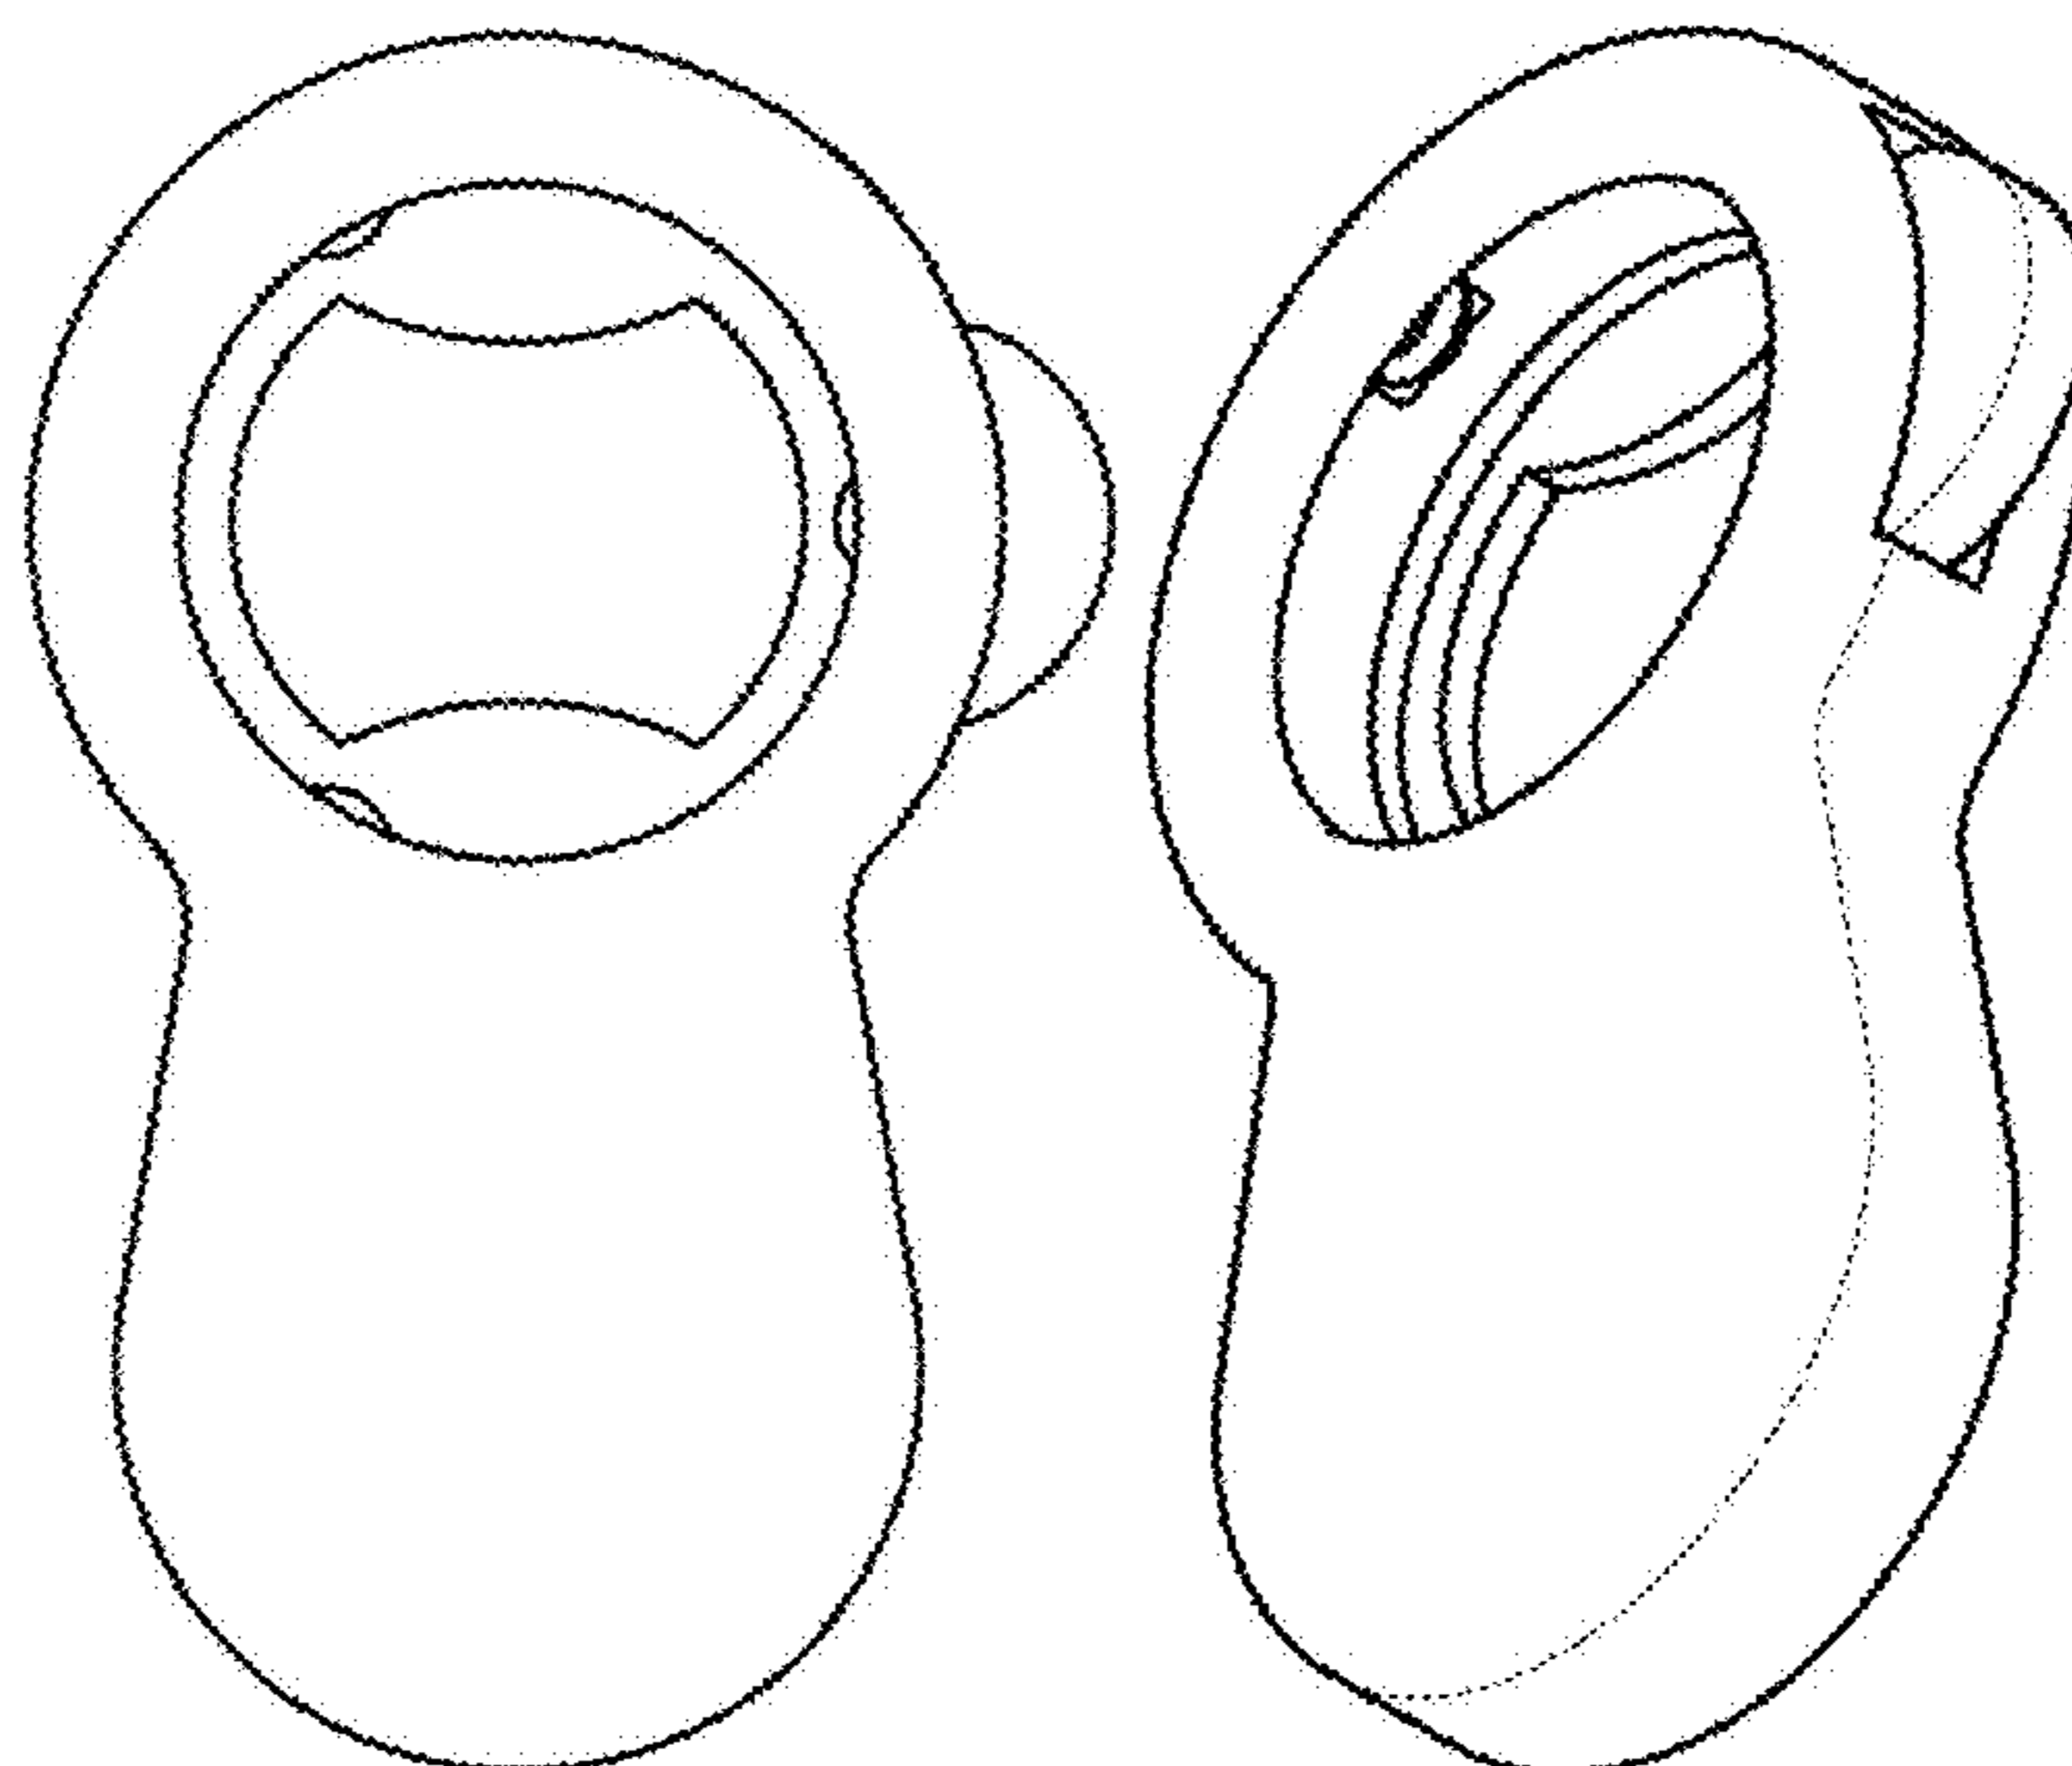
is a top right perspective view of the foil cutter bottle opener of FIG. 1;
